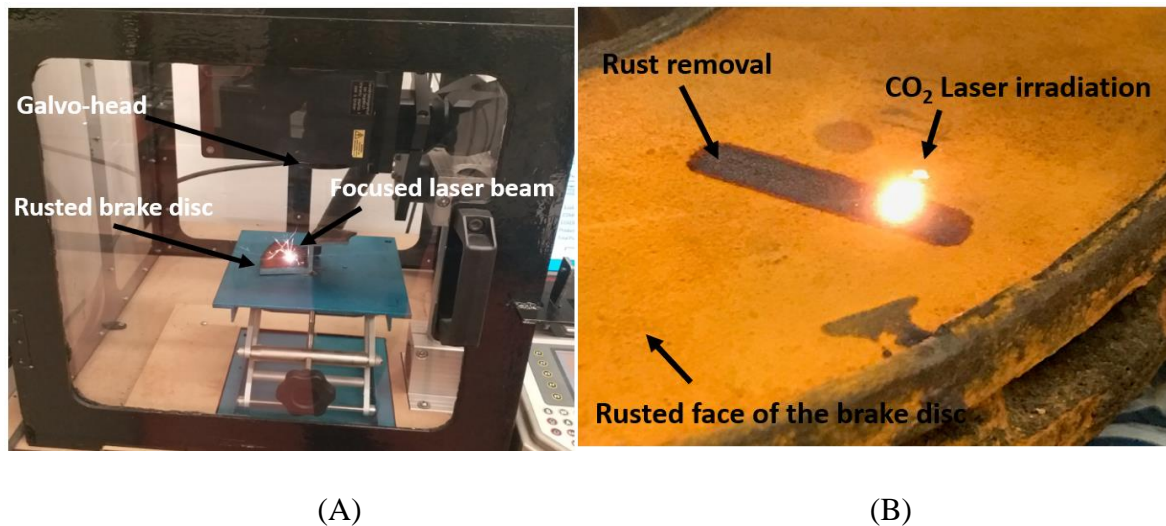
SHOWING EXPERIMENTAL SET-UP OF THE CO₂ LASER RUST REMOVAL PROCESS IN (A) AND METHOD OF RUST REMOVAL IN (B).
